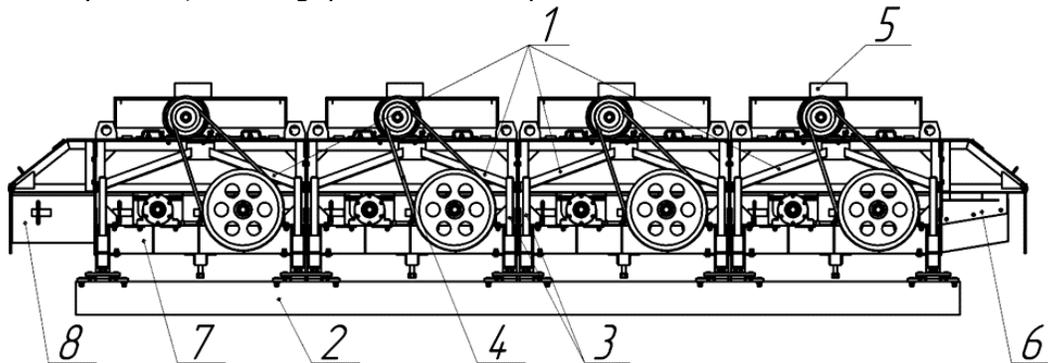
Four section rotary mixer: (1) mixer section; (2) support; (3) adjustable screws; (4) belt transmission; (5) electric motor; (6, 8) shielded input and output sections; (7) seal
